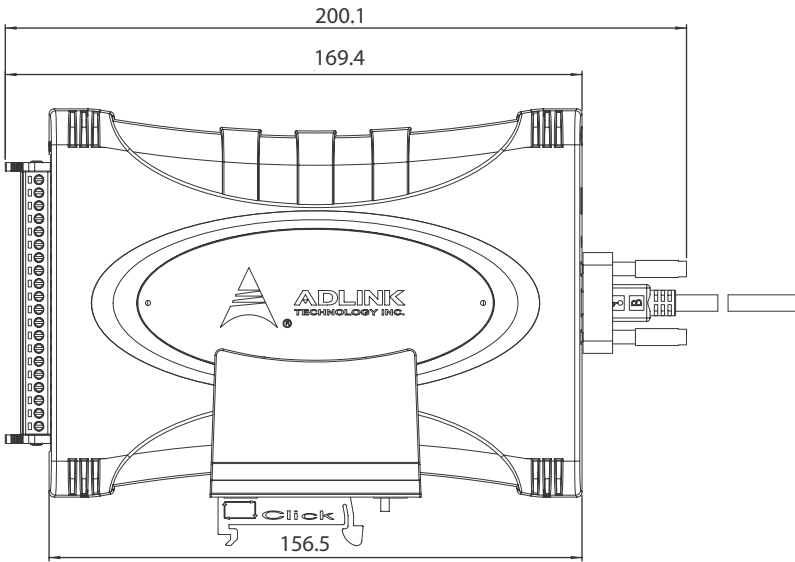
Module, Stand, & Wall Mount Kit Side View (w/ connections)
